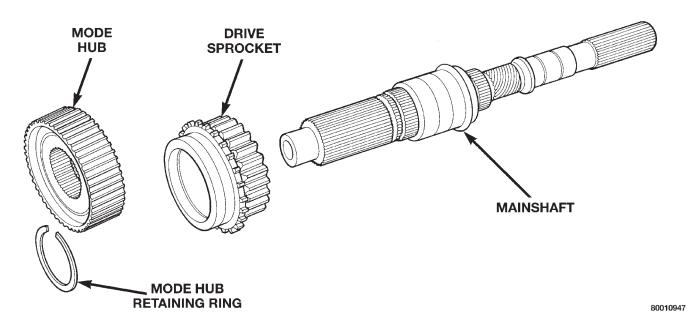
Mainshaft, Mode Hub, And Drive Sprocket
